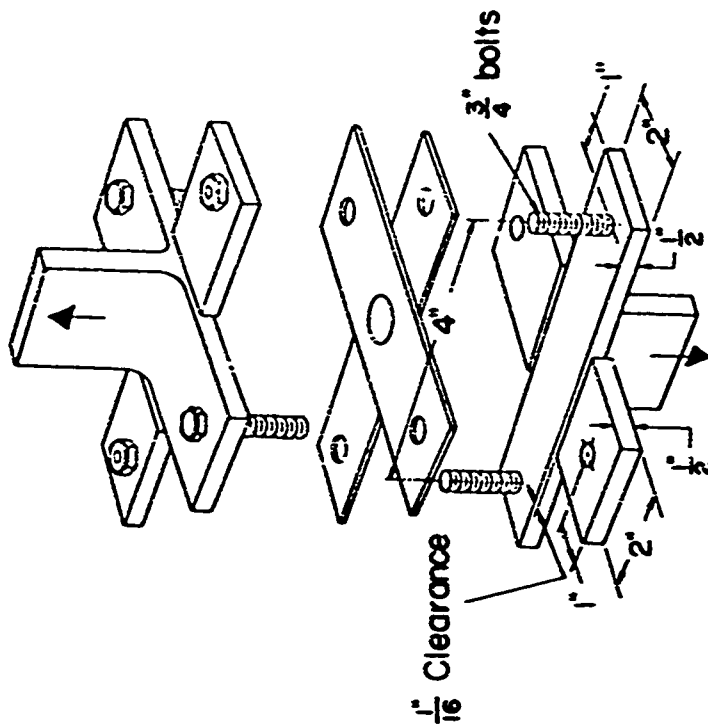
JIG FOR CROSS-TENSION TEST (REF. 11)
